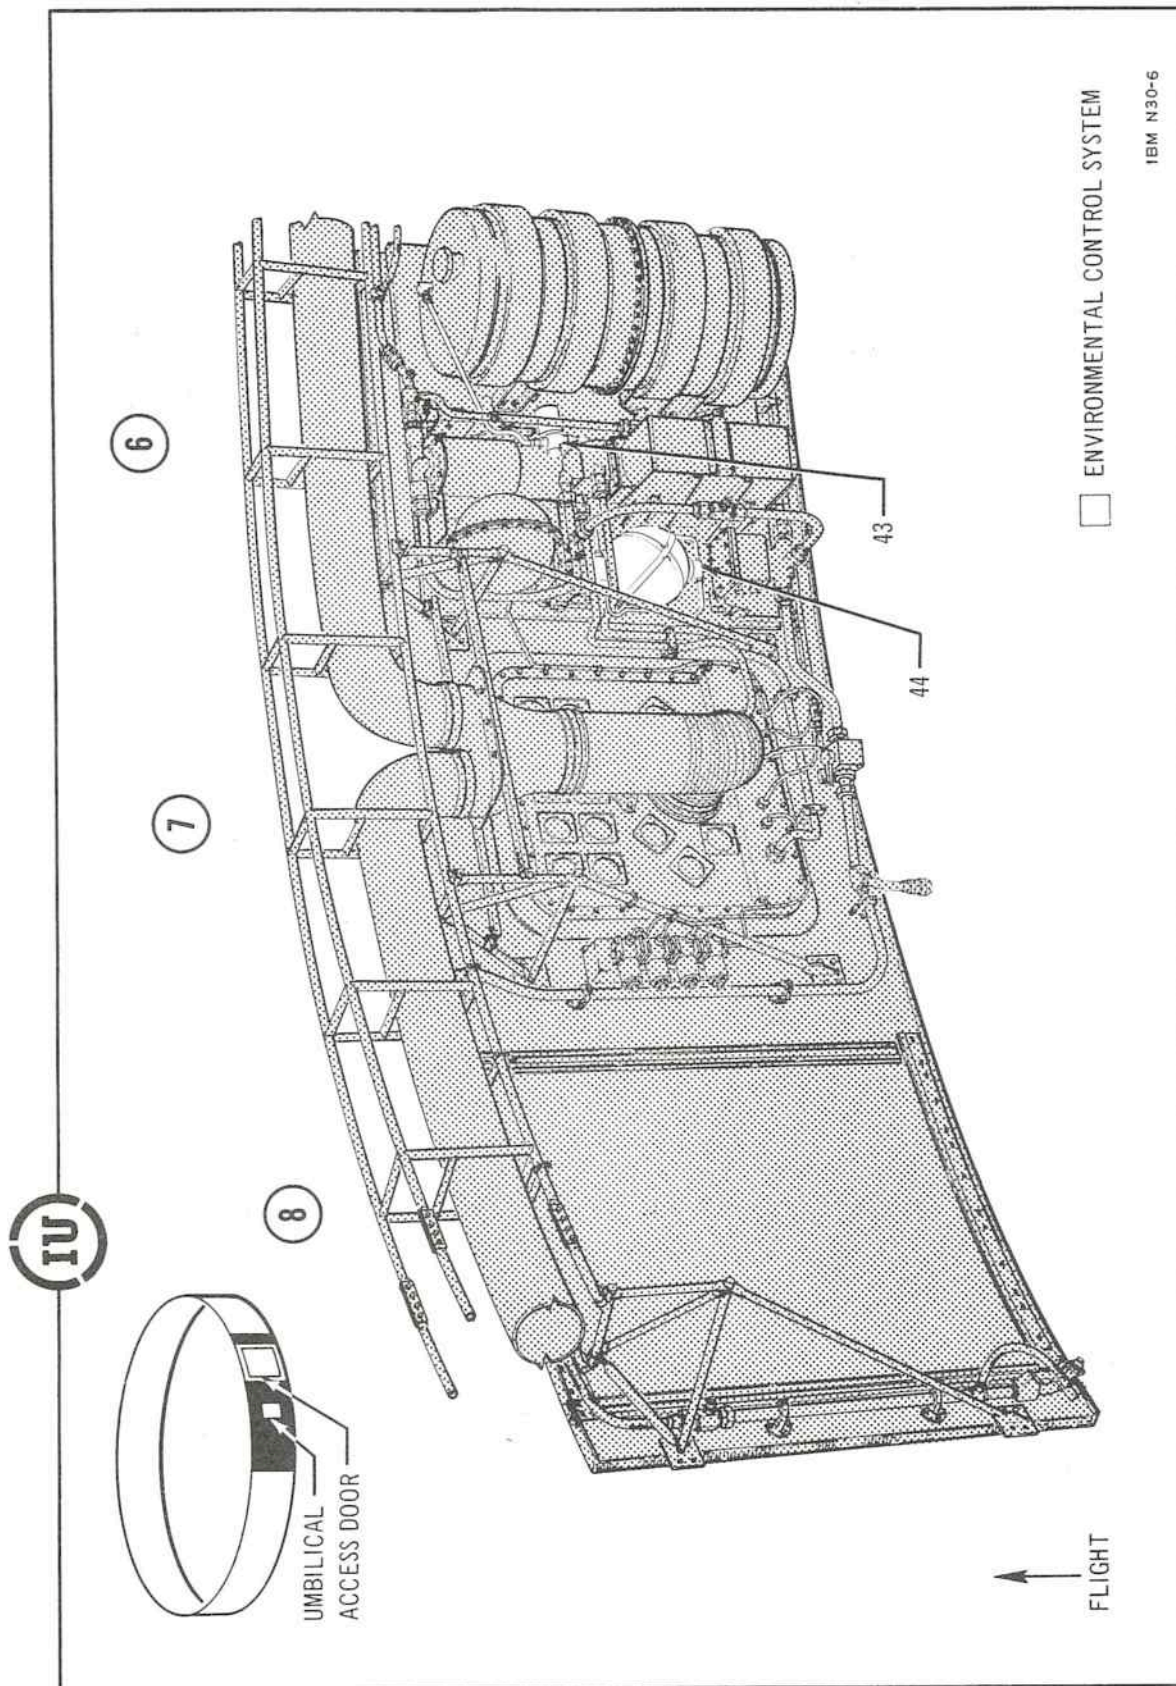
Instrument Unit Component Locations (sheet 6 of 19)
